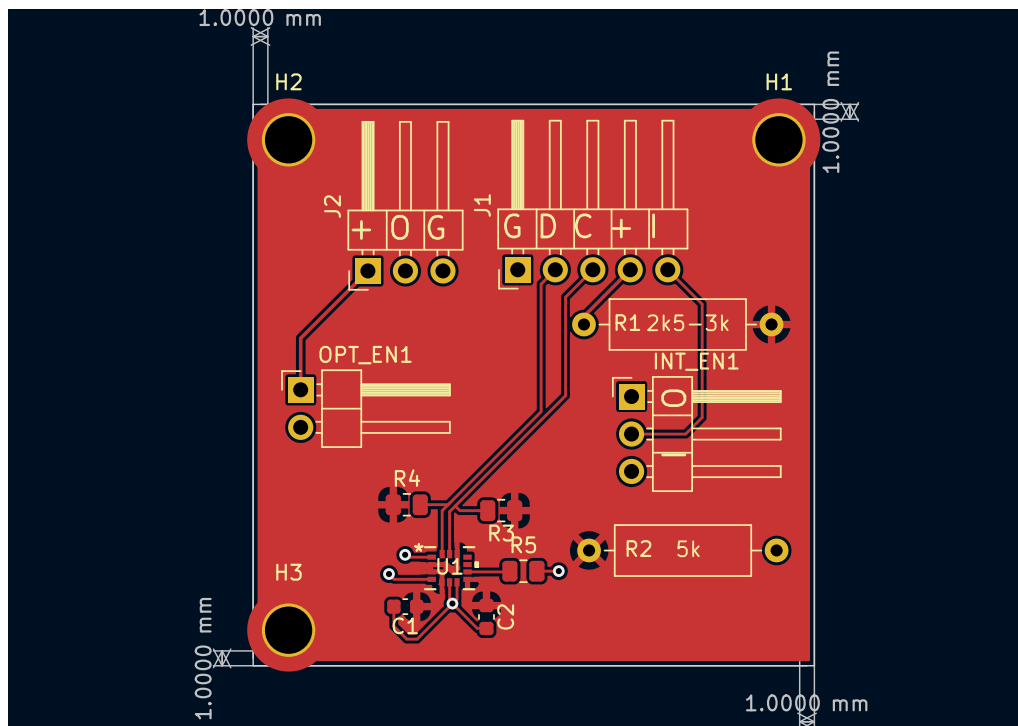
Measurements of outline and mount points of the IMU boards, and front copper design
